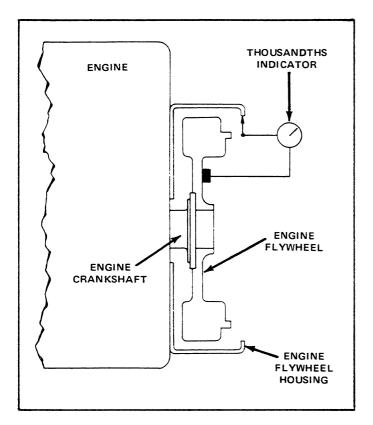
Checking the Bore of Engine Flywheel Housing.
